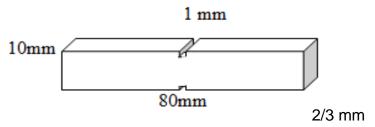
Printed test pieces for impact resistance tests with a 1mm notch.
